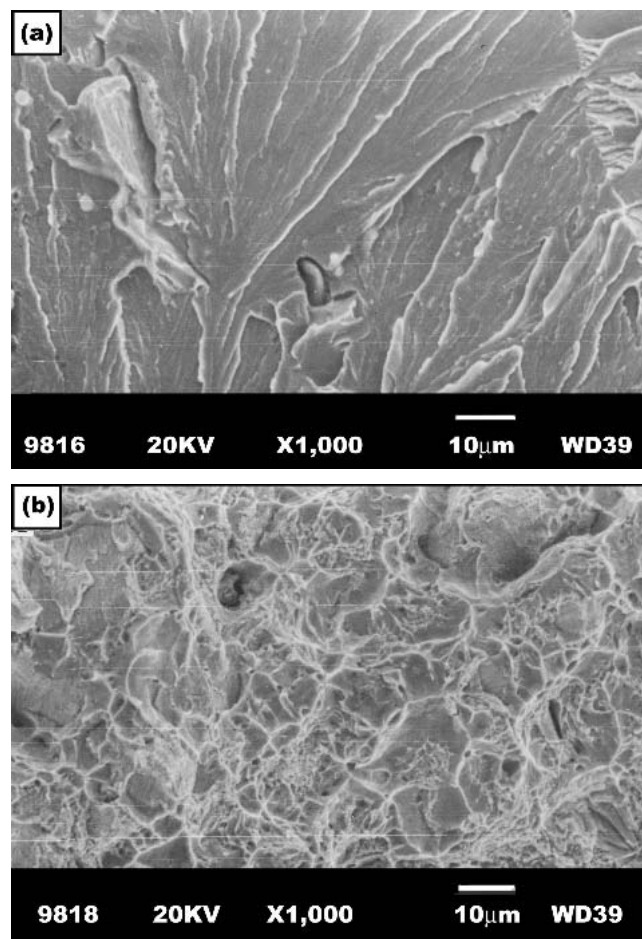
SEM fractographs of tensile fractured surfaces of (a) as forged-rolled and (b) as normalized micro alloyed wheel steel B revealing brittle fracture in case of forged-rolled wheel where normalized wheel shows a ductile fracture
